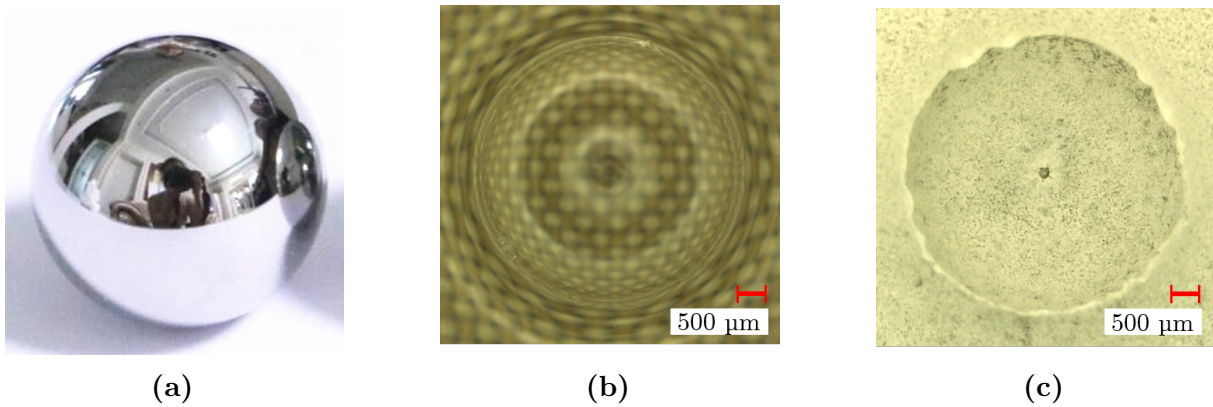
(a) Bearing ball (5 mm diameter); Molded shape using DC 93-500 silicone: (b) before coating, (c) After coating using 8 layers.
